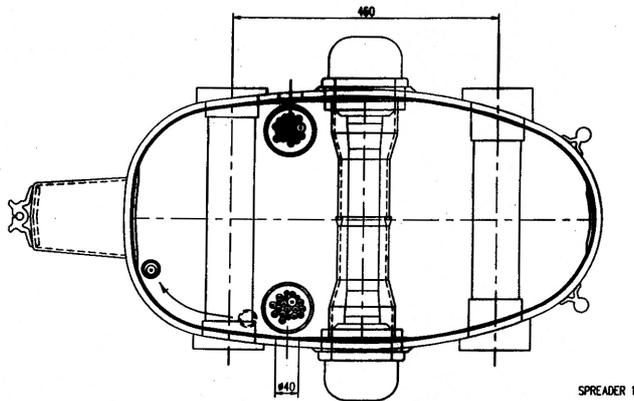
Cross section of a mast with connections for diagonals and spreaders (pitch 460)
